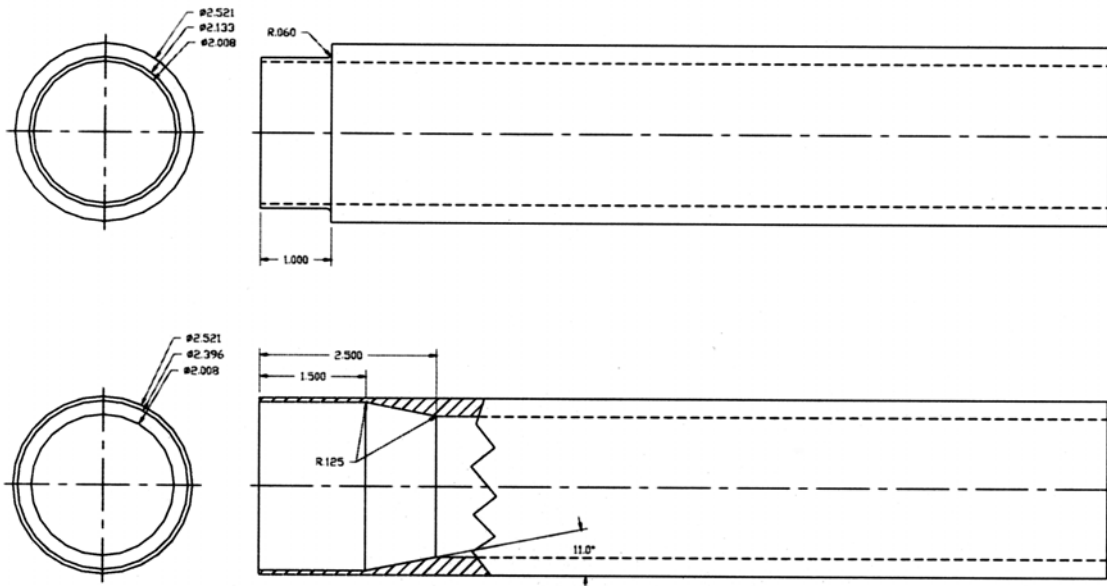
Lap joint configuration used for magnetic impulse welding of MA956 tubes.³⁰
